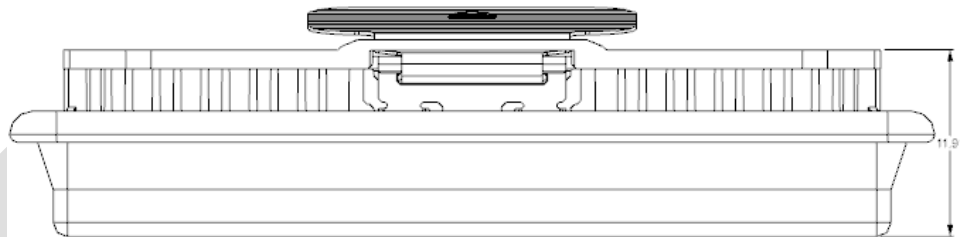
Top View of Free-Side Connector with Dust Cover Attached
